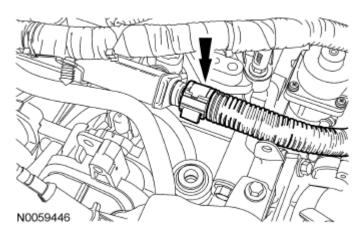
Locating Fuel Vapor Tube Retainer Courtesy of FORD MOTOR CO.
